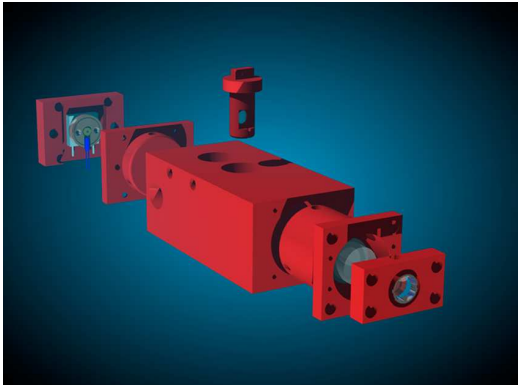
External Cavity Diode Laser CAD explosion scheme [107]
